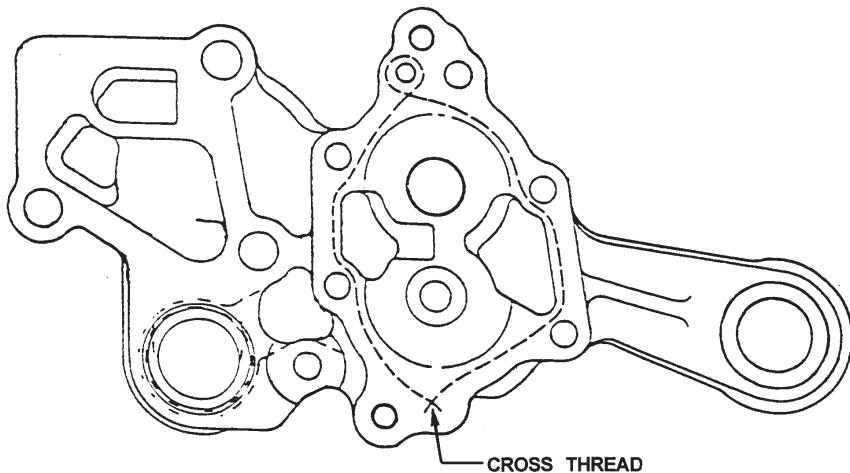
Oil Pump Housing Silk Thread Pattern
